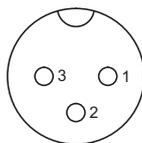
Power Supply plug for CameraLink model, 3-pole (rear view, solder side)
